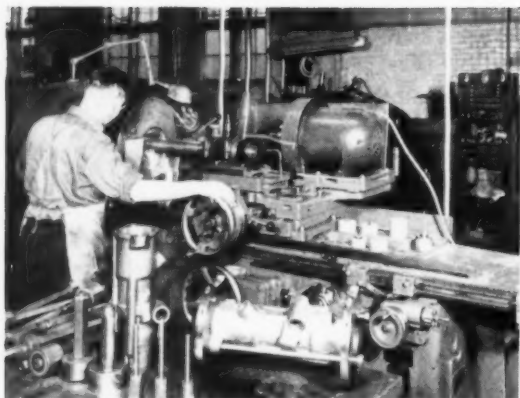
Finish grinding of rock drill cylinder of carburized steel. Tolerance is held to .0005". About .025" of stock is removed.
